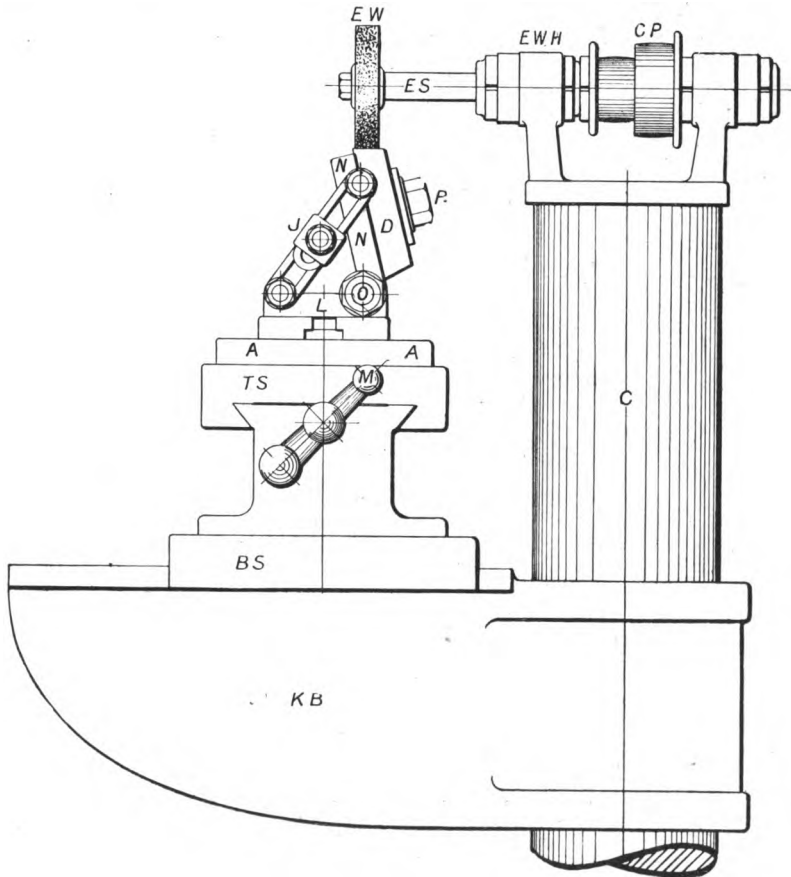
"Ward" Machine operating on the edge of Press Die.
